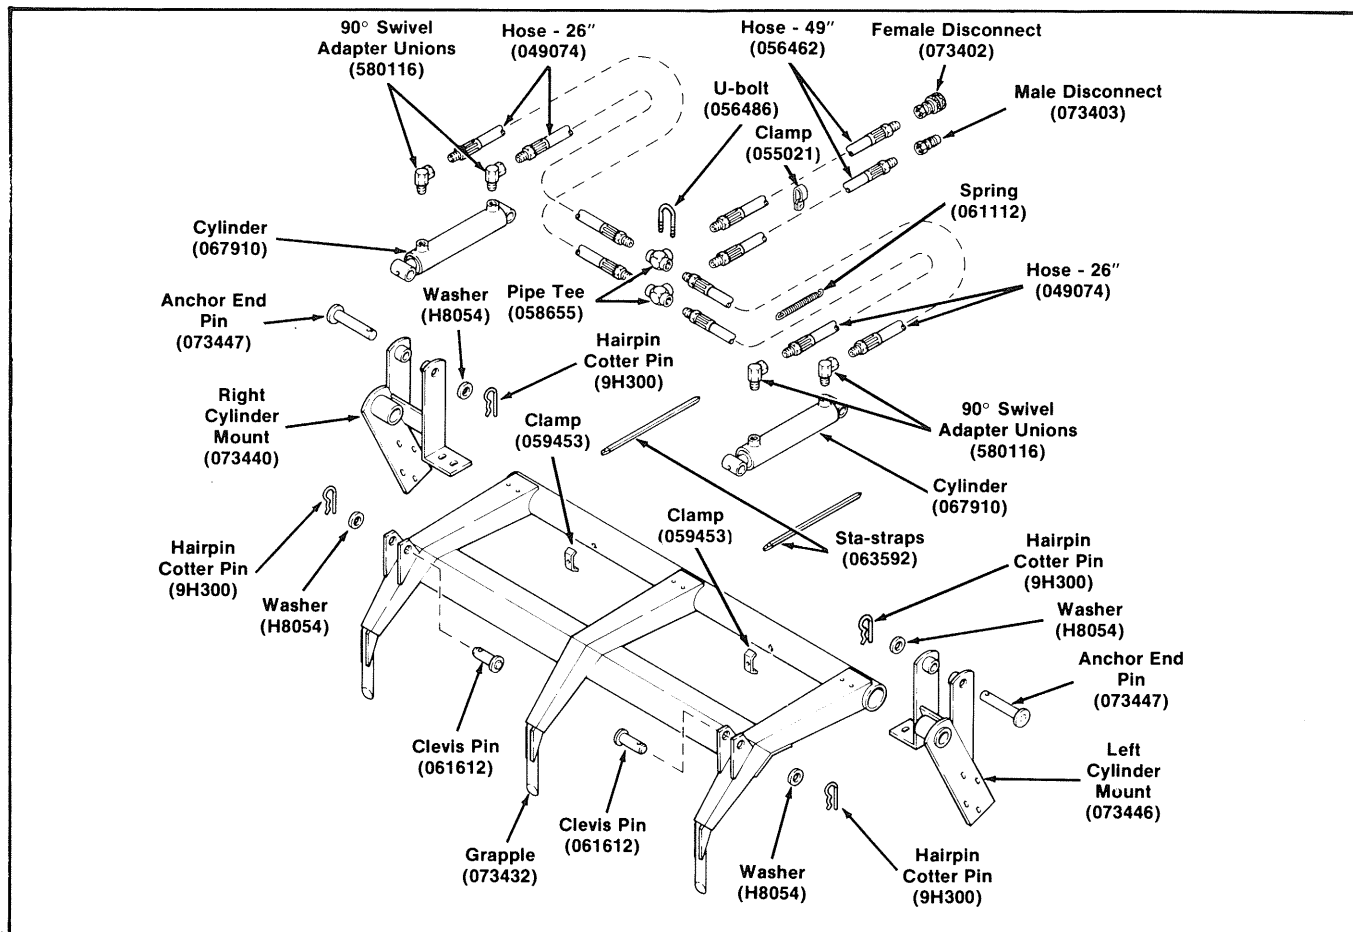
Grapple Fork Exploded-part Assembly View
